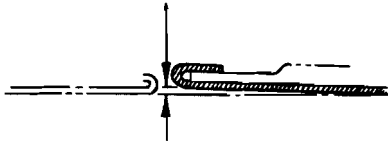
Specified Body Opening Clearance Tolerances - "F" Styles
